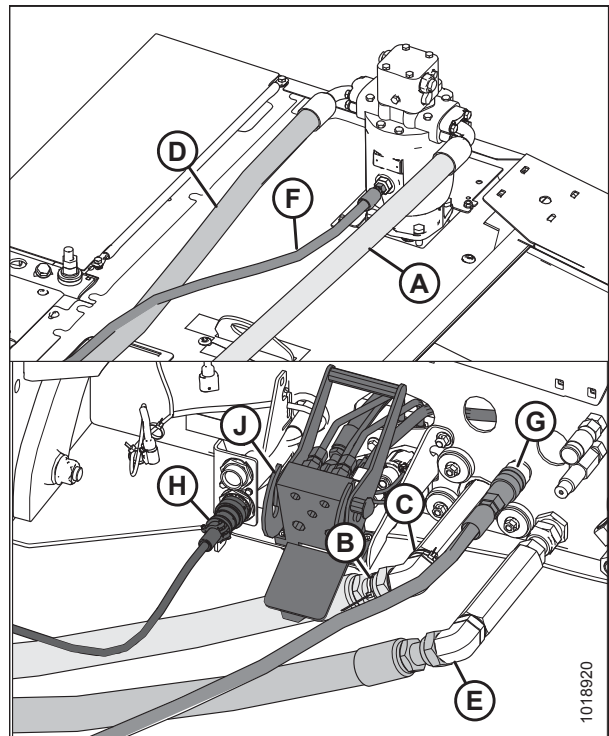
Protective Shipping Plugs on M1240 Hard Plumbing Connections (Parts Removed for Clarity)
